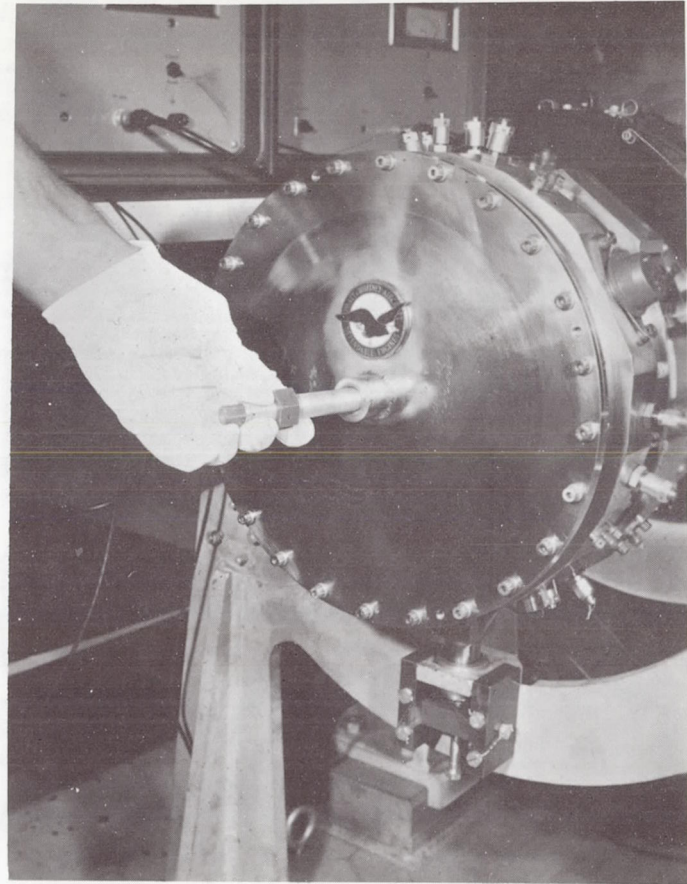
Rear Axial Shipping Fixture Adjusting Screw
